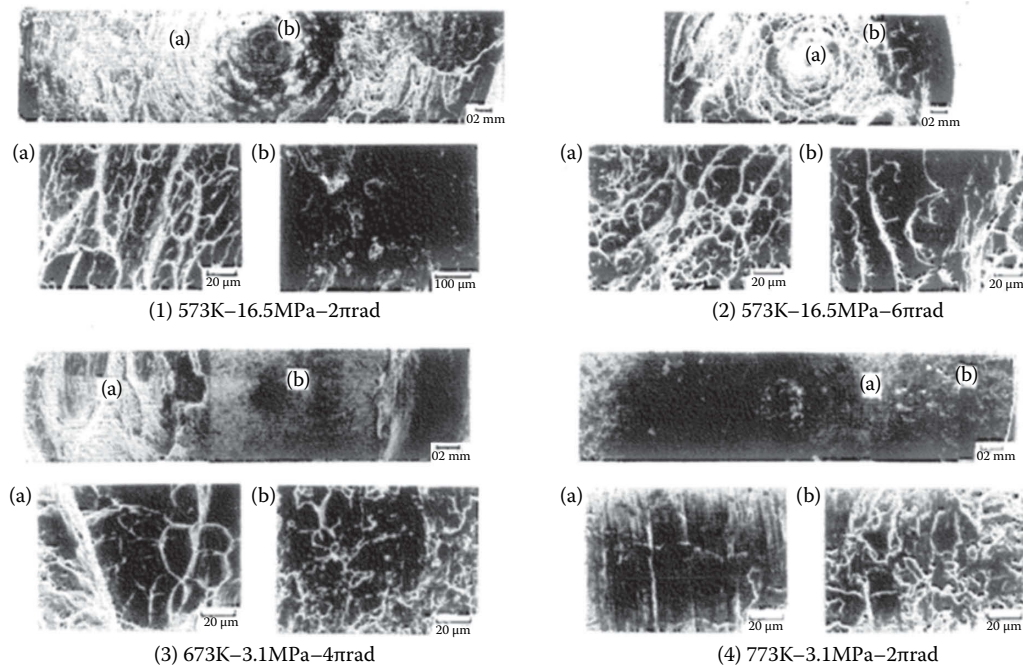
Scanning electron micrographs showing tensile fracture surface of the welded joint
